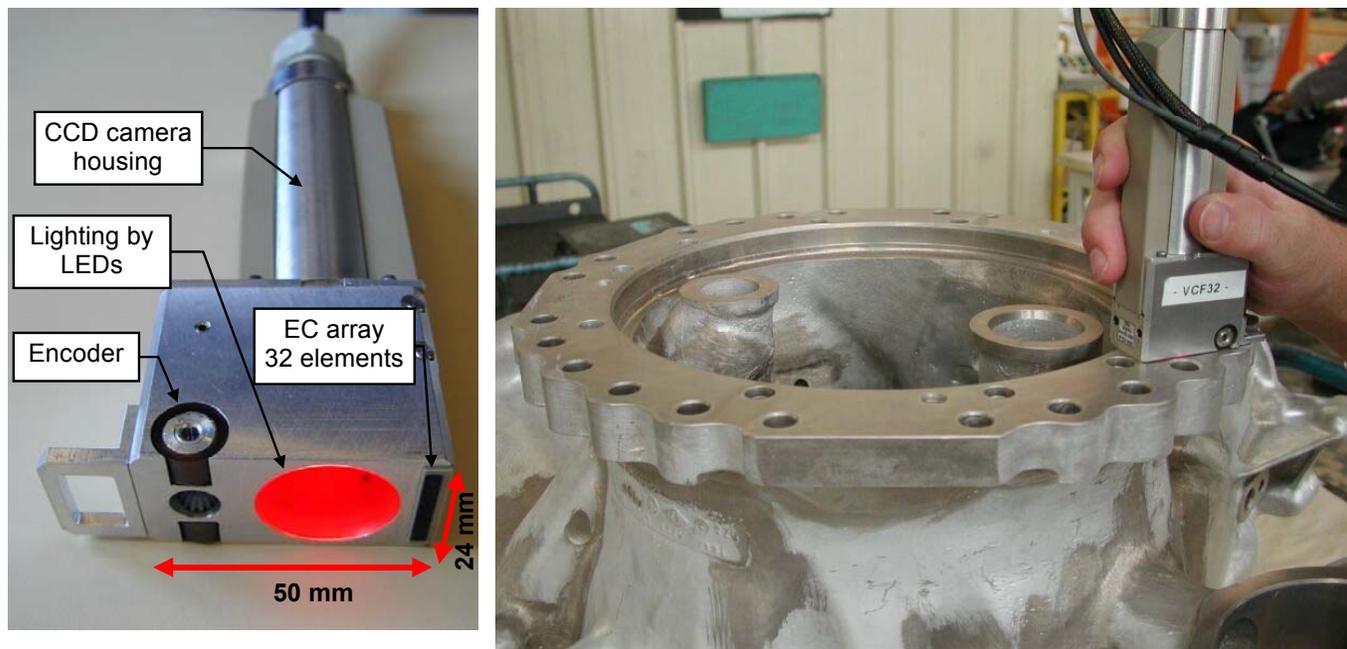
General view of the CODECI probe. Inspection of an helicopter gear housing with the probe.
